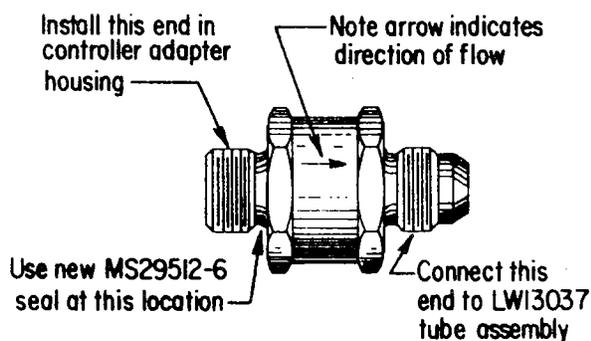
Fuel Drain Line Check Valve No. LW-12745
